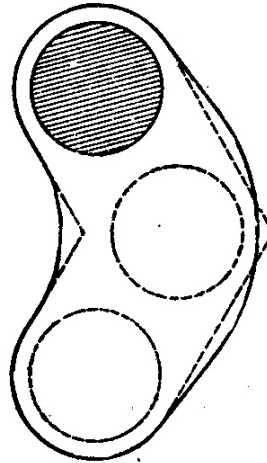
Curved long arm of six-throw, three or four-bearing crankshaft.
